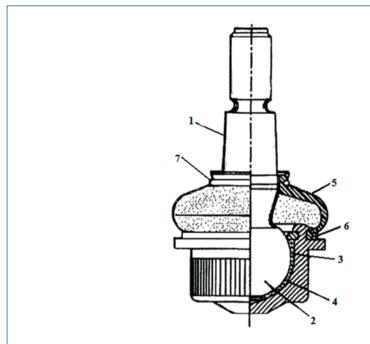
The ball joint assembly. 1 - stud, 2 - ball, 3 - grease, 4 - socket, 5 - elastomeric boot, 6, 7 - lower and upper clamping rings
